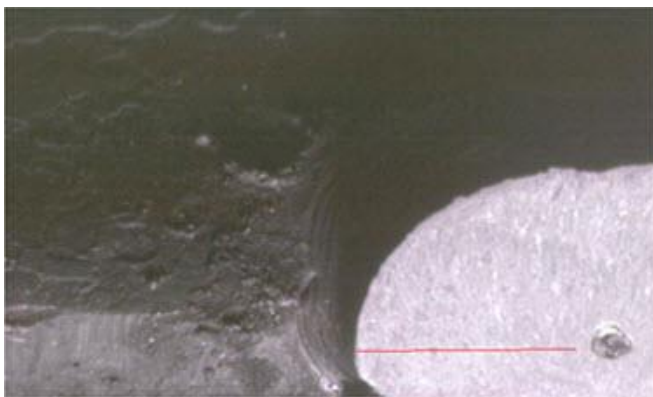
Measurement of parameters  $a$  and  $b$  of the Goldak thermal model in welding
